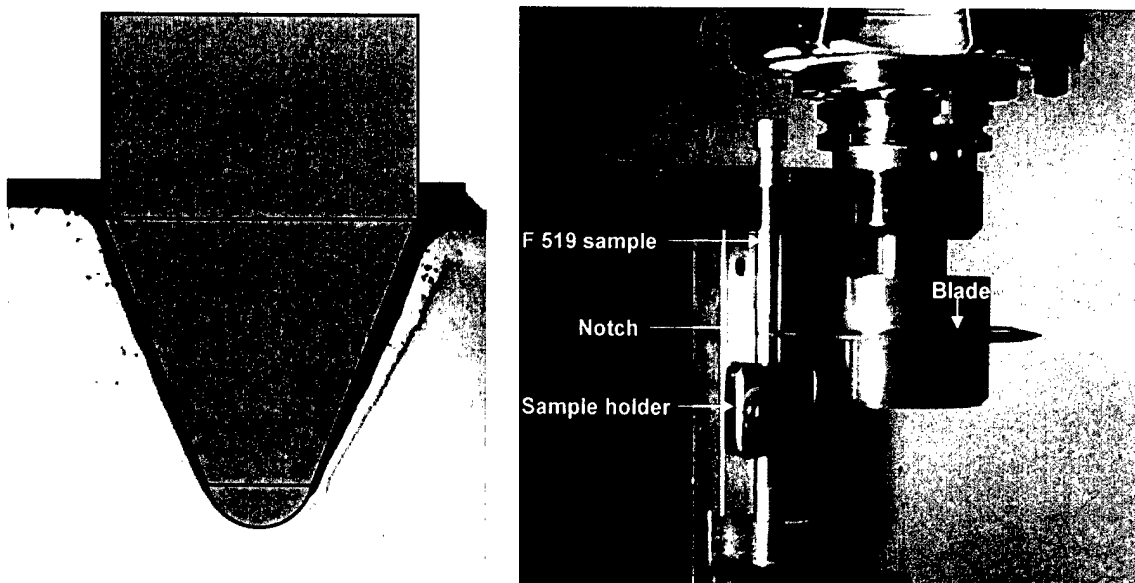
Method for Scribing the Notch (exposing the substrate) on a CNC Milling Machine (Left – schematic of cutting blade in notch; right – actual set-up on CNC machine)
